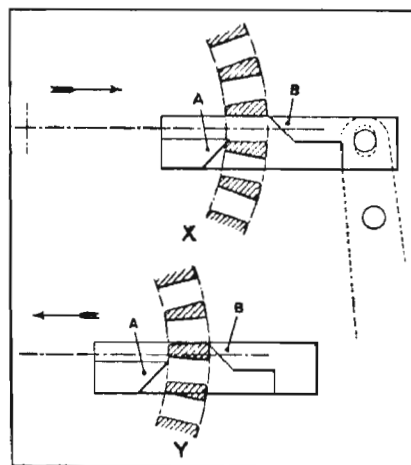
Simple Indexing Mechanism which is Operated Rapidly by One Lever
